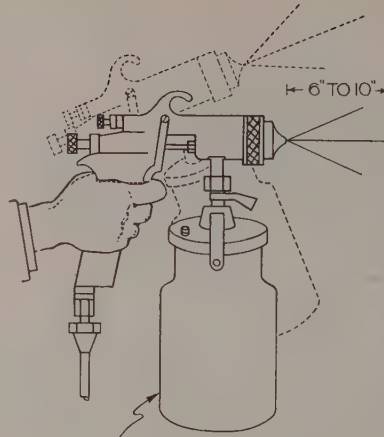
Spray gun should be held perpendicularly to the surface as shown by solid lines here
